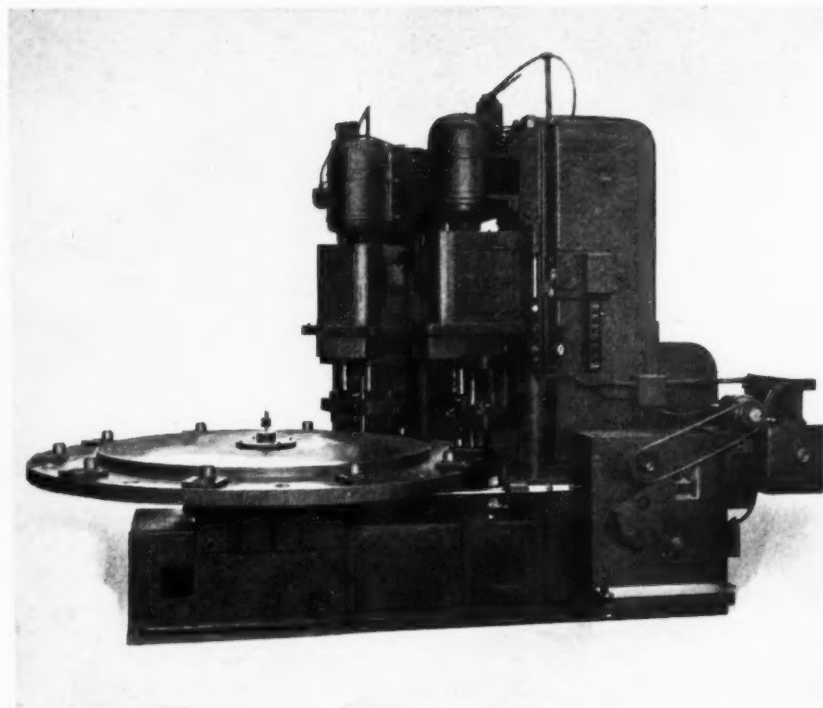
Special Machine Built by Baker Brothers, Inc., for Automatically Drilling Forty Holes in Turret Ring for Tanks
